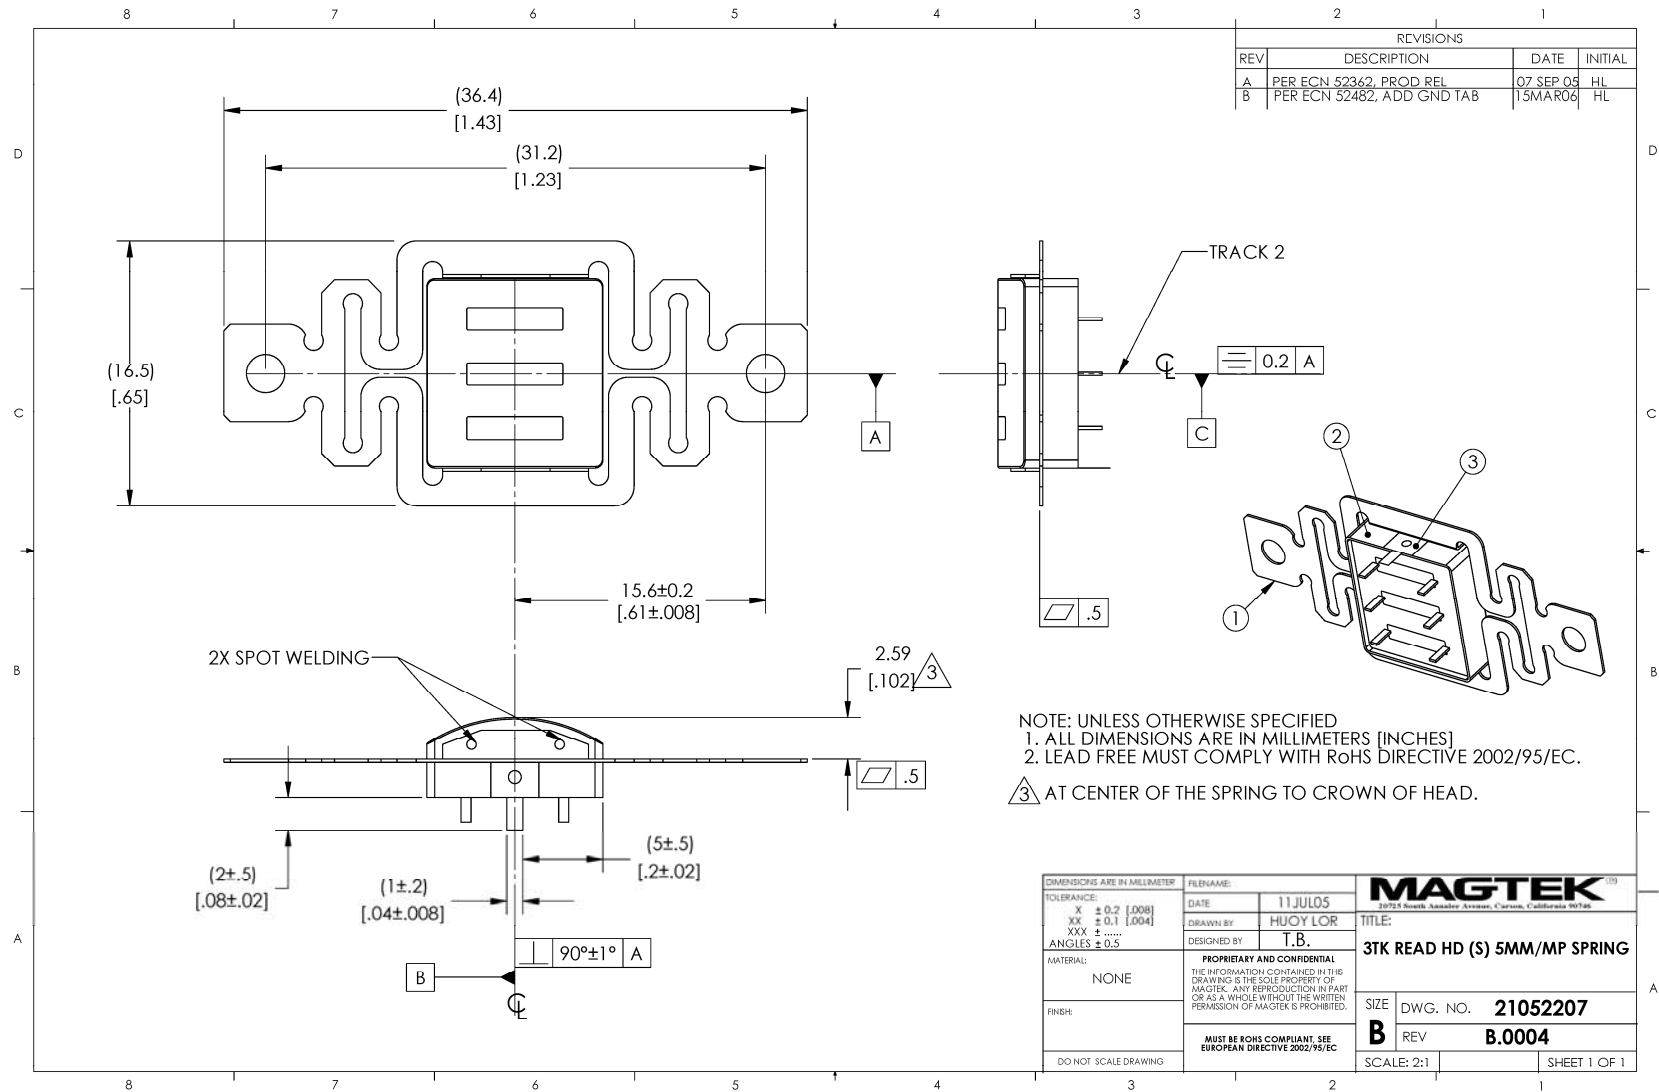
3 Track Read Head 5mm Accordion Spring
